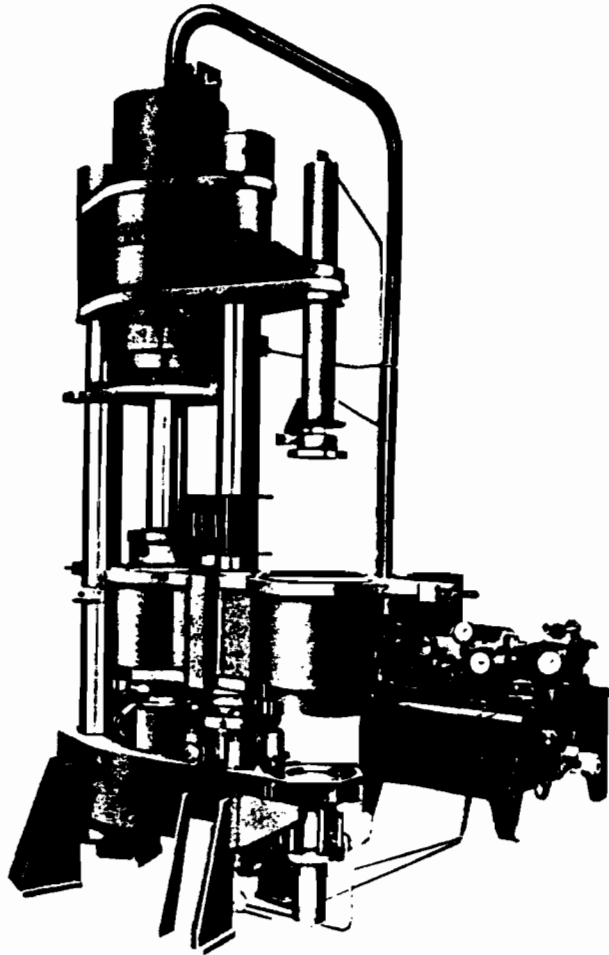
Modernized classical heated extrusion press for double-base powder (Courtesy Werner & Pfleiderer, D-7000 Stuttgart, FRG).
